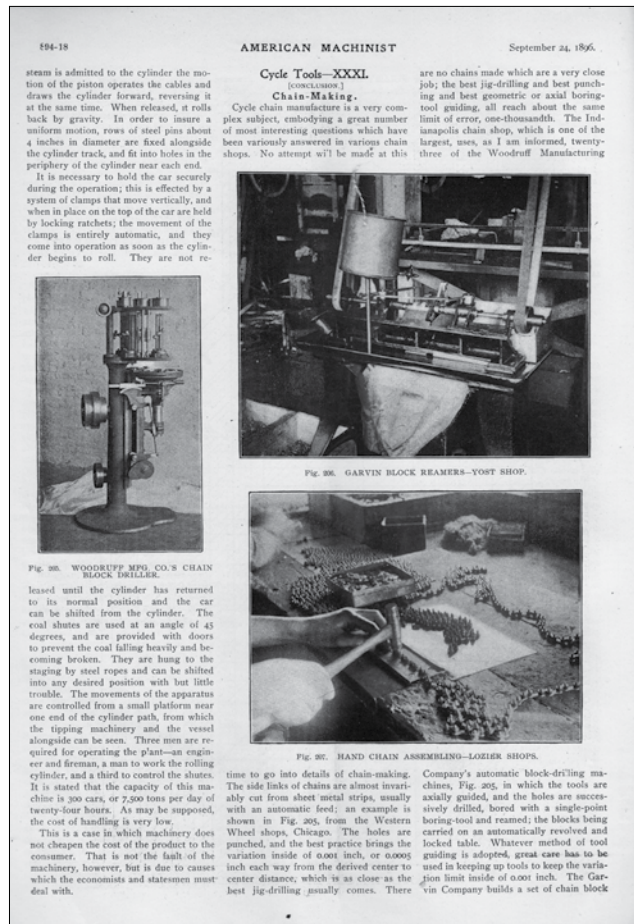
Chain Block Driller. Woodruff Manufacturing Co. American Machinist, September 24, 1896.
